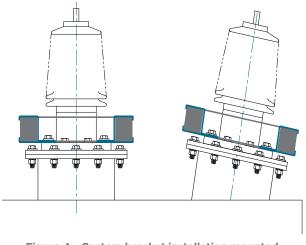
Custom bracket installation mounted to and above the bushing flange
